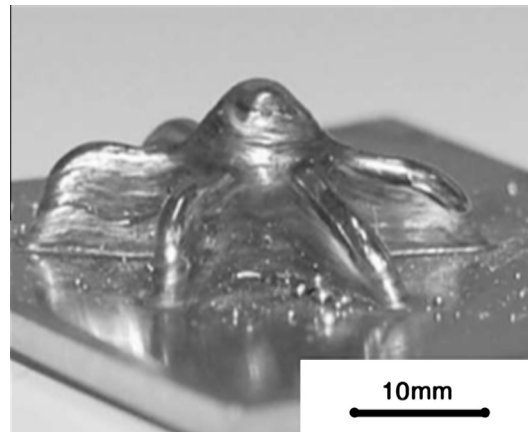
Typical material deposited using micro-GTAW deposition method [72].
